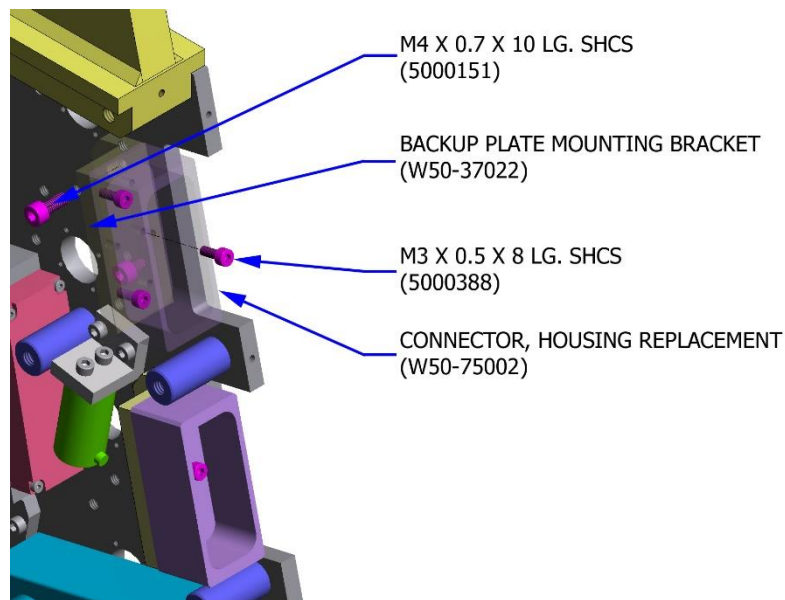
Removing the backup plate mounting bracket and connector, housing replacement.
